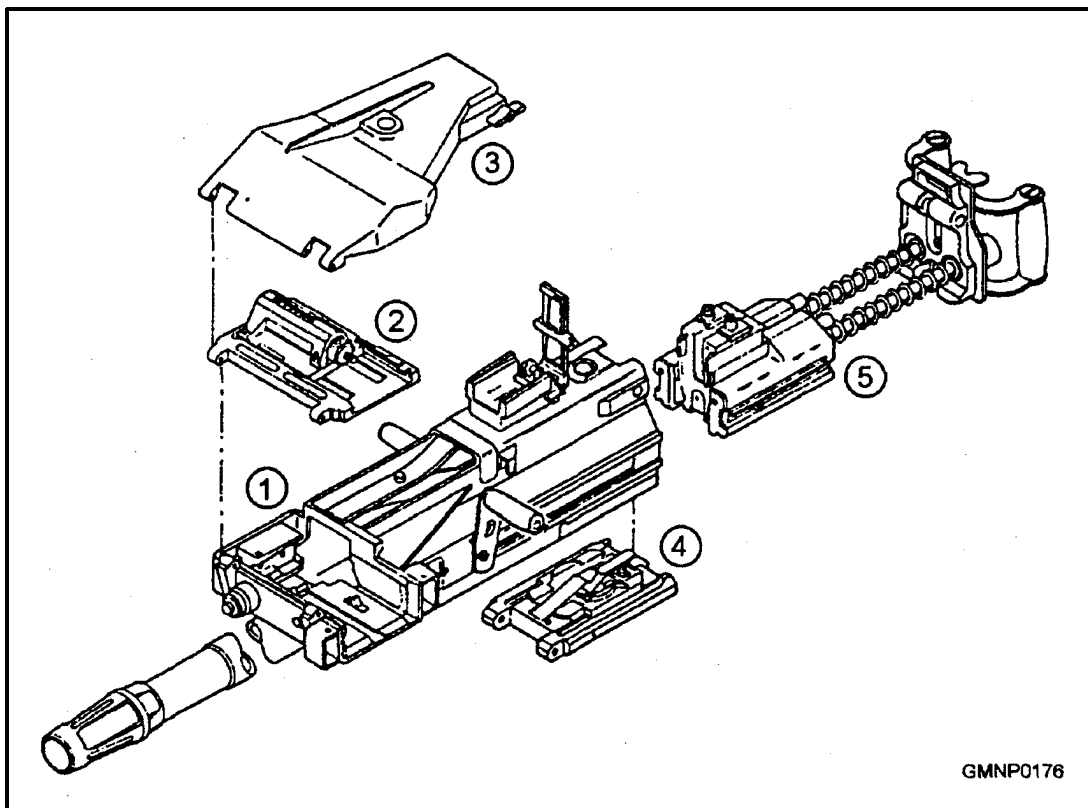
Major components of the Mk 19 Mod 3 machine gun.
